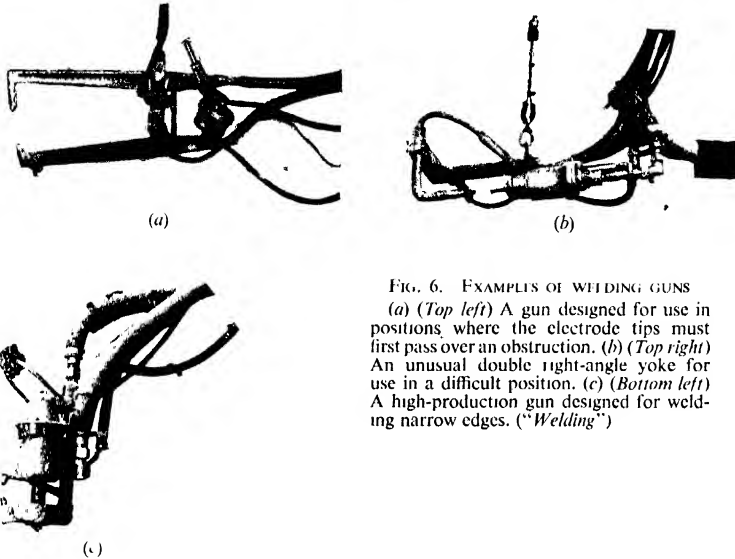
EXAMPLES OF WELDING GUNS
